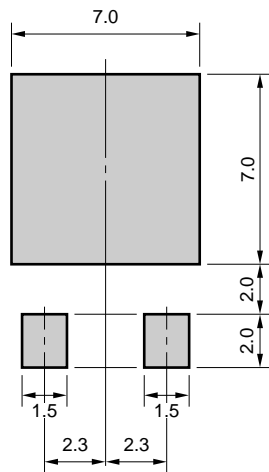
MP-3Z Typical Mounting Pad Dimensions (unit: mm)
